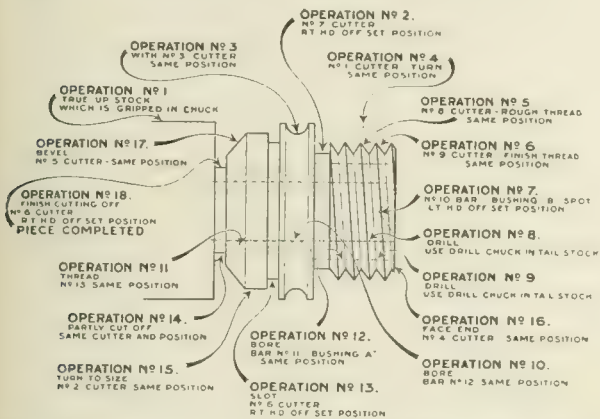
A Job Completed with the Almond Tool Holder, Using Practically Every Cutter in the Set.
